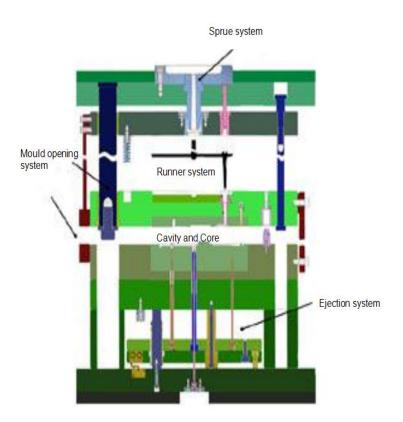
An injection three-plate mould (Sharon, 2009)
